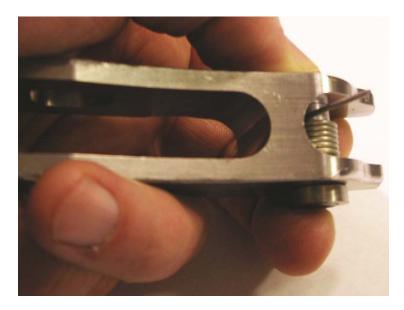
Assemble Keeper, Spring, Spacer & Alignment Pin.
